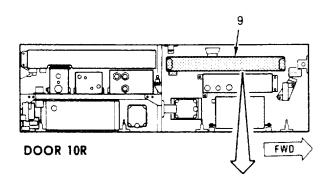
Fuel Quantity Gaging System Component Locator (Sheet 5)
